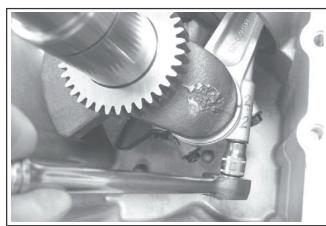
Torquing Connecting Rod End Cap Screws.
